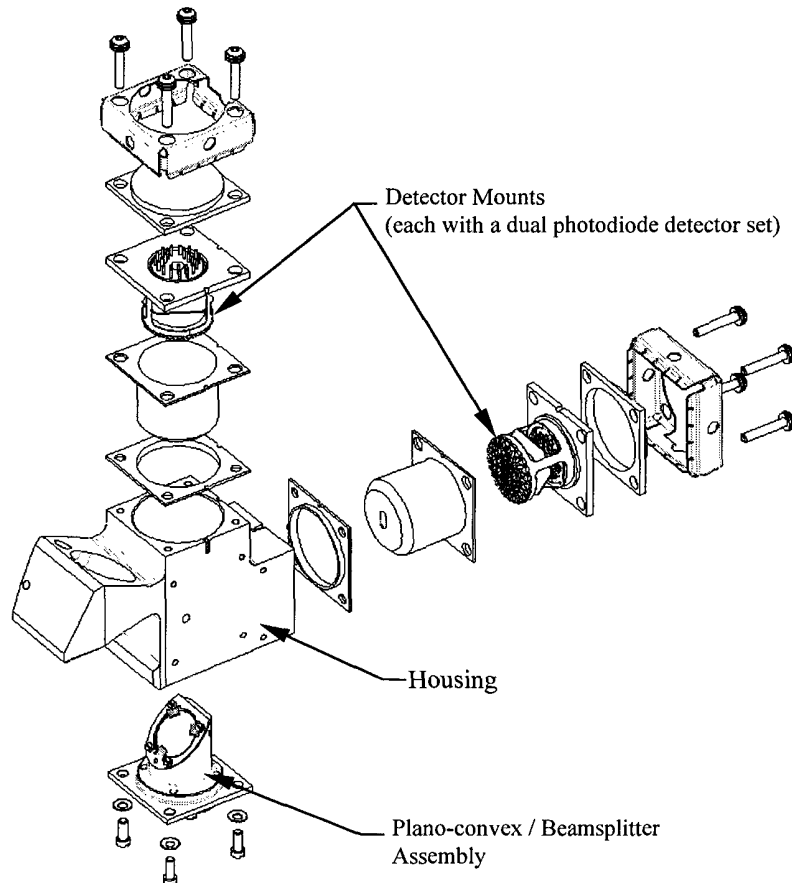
Exploded view of the Detector Package. The optical sub-assembly and Detector Mounts attach to a titanium housing. Various EMI shields and electrical isolators are also shown.
